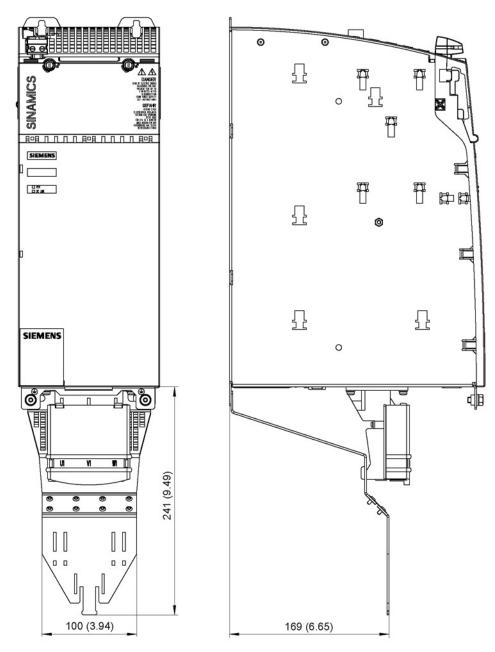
Dimension drawing of shield connecting plate on a 150 mm component with internal air cooling, all dimensions in mm and (inches)
